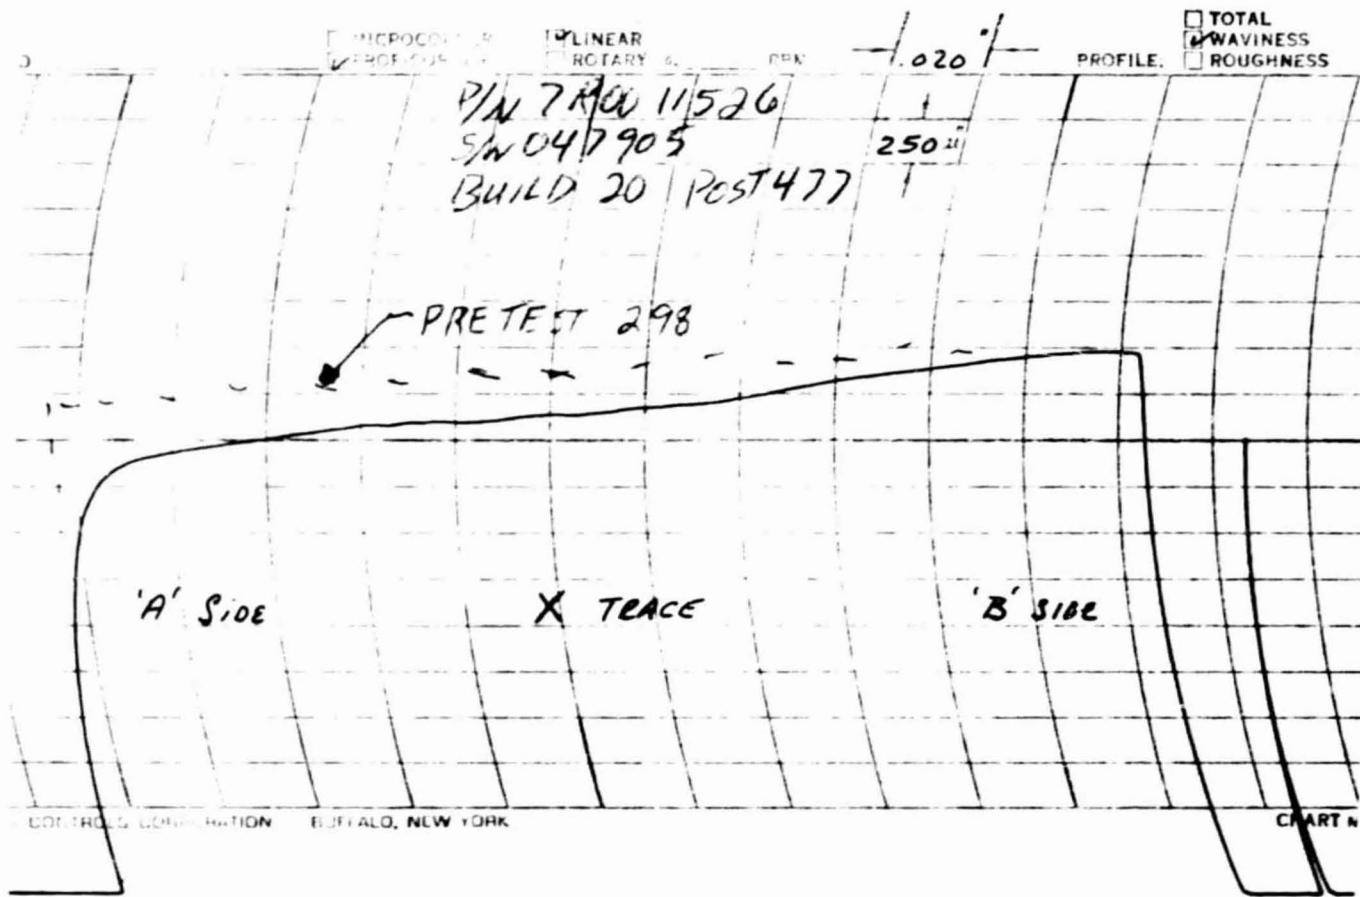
Surface Profile Trace Pump End, Secondary Seal Ring, P/N 7R0011526, S/N 047905, Build 20, Posttest 477
